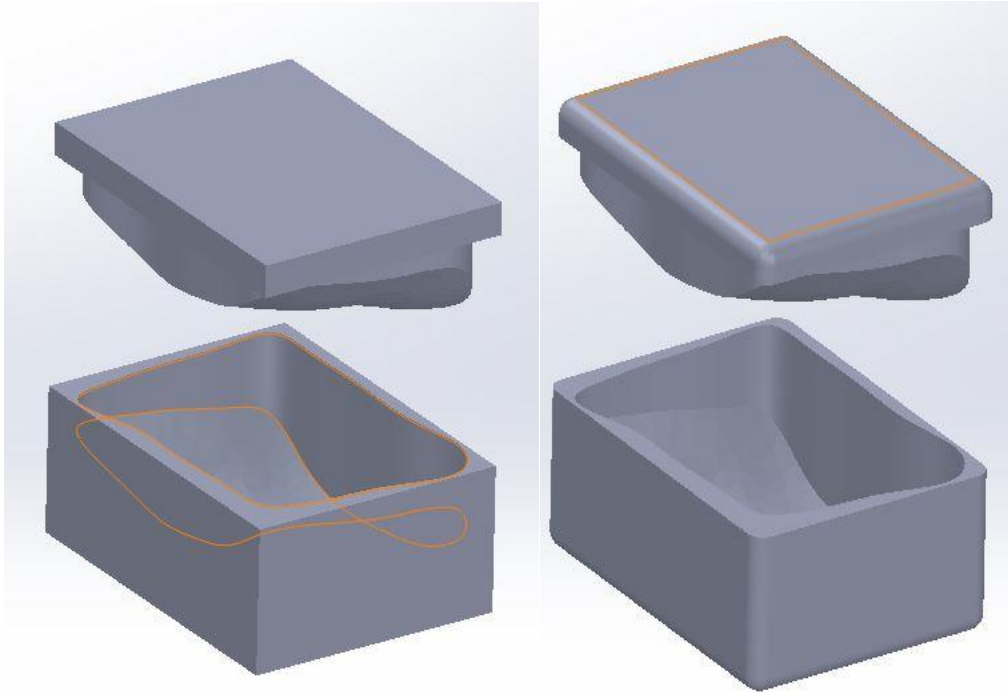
Abdomen mold (left) and filleted abdomen mold (right).
